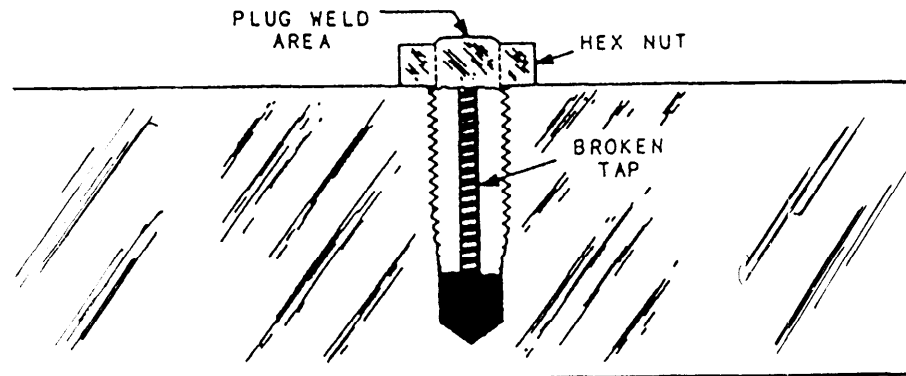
Using a plug weld to remove a broken tap.
